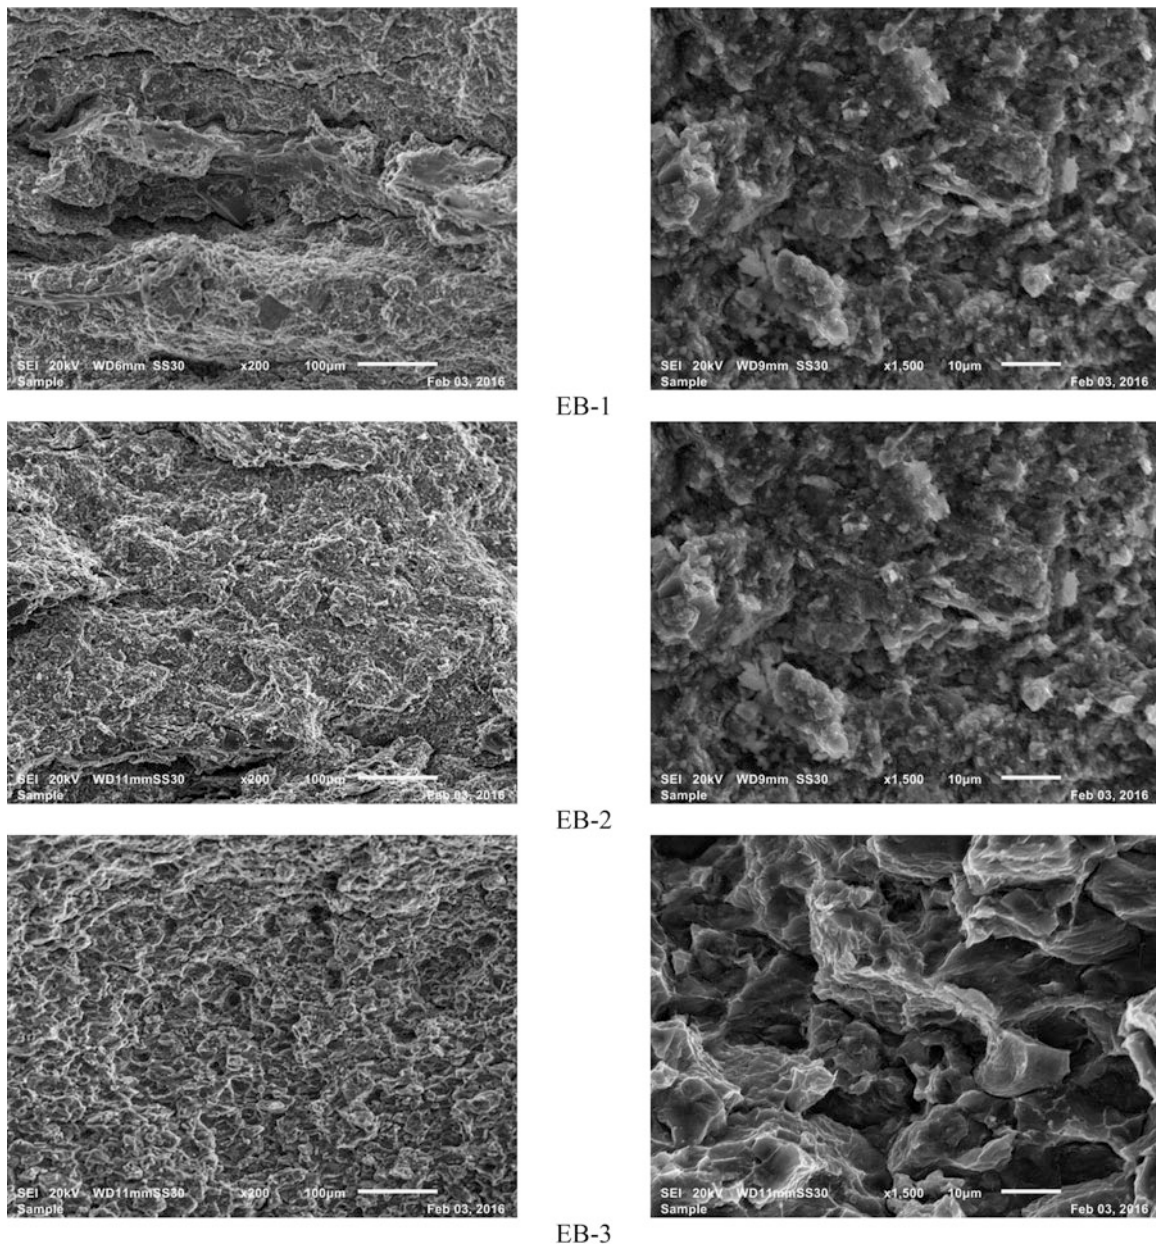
Fracture surfaces taken from broken specimen by impact test
